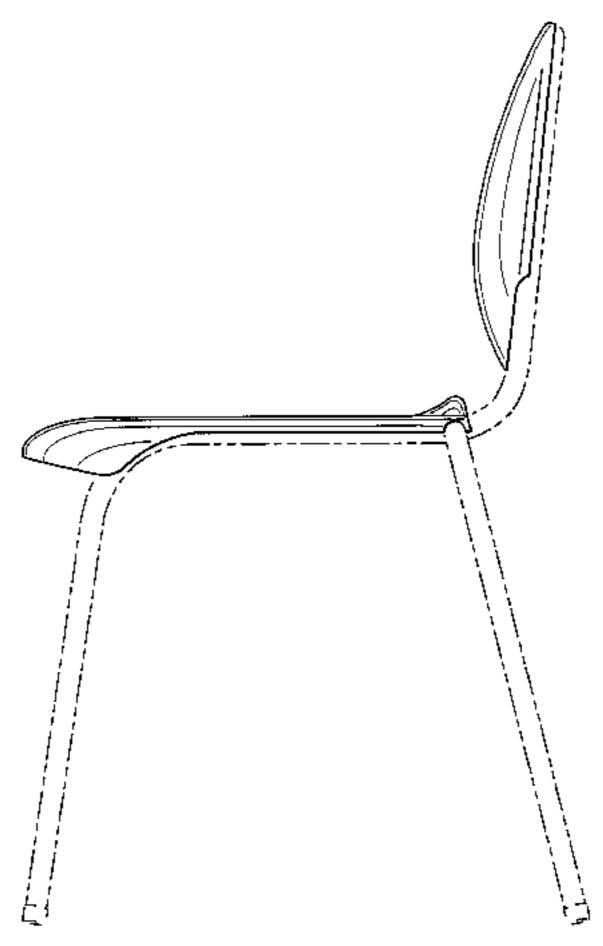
is a slightly enlarged side elevation view of a chair, seat and back;
